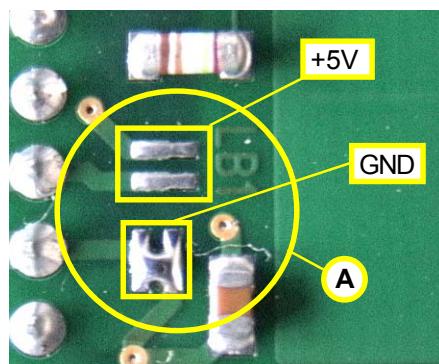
Soldering pad "LB1" and "LB2" (PCB "DSP01")
